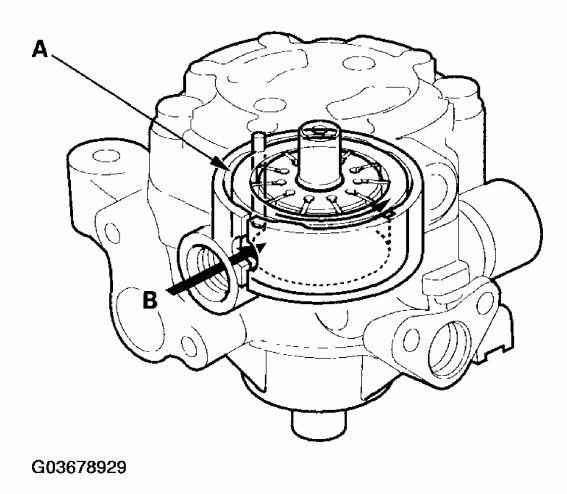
Pushing In Cam Ring From Pump Housing Cap Hole Courtesy of AMERICAN HONDA MOTOR CO., INC.
